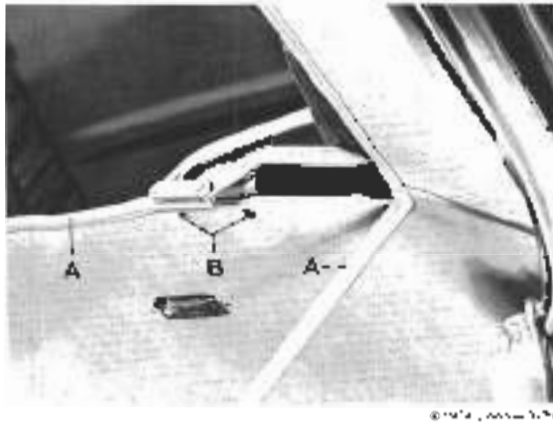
Screws with self-locking nuts B that must be removed before you can remove beading A.
